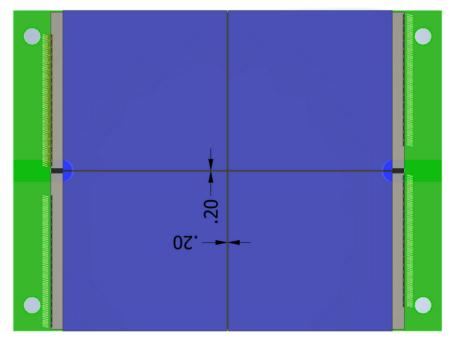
Positioning of ETROC+LGAD subassemblies on the module PCB
